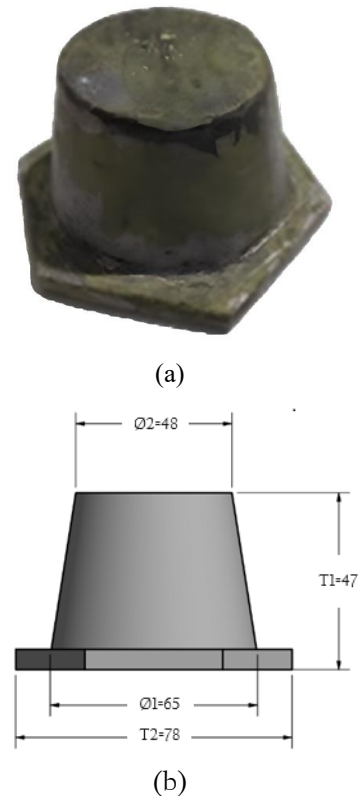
Shape of specimen, (a) pattern, (b) dimension of specimen (all units in mm)
